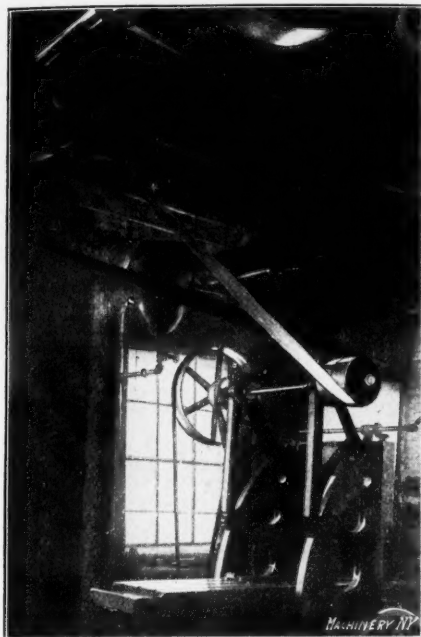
Special Countershaft Brackets fitted to Planer Housings
